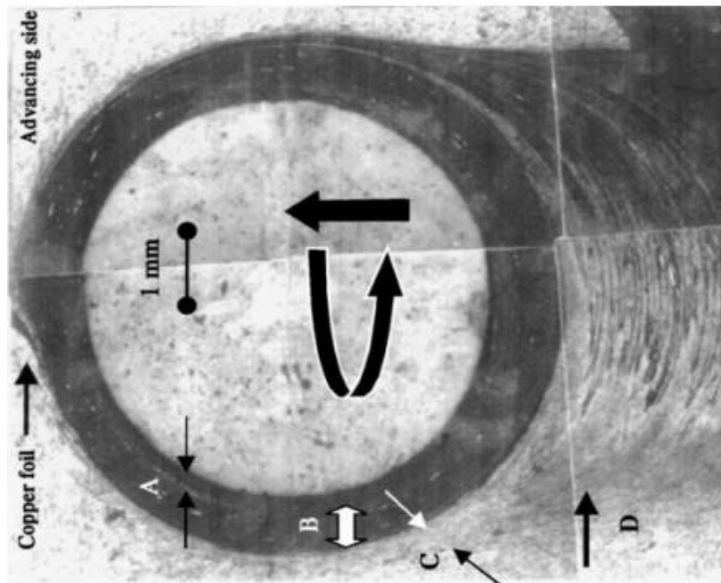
Plan view at mid thickness of weld with a frozen nib. A copper foil marker was on the faying surface of the Al 6061 and is seen at the top. (A) Gap without material. (B) Rotational zone or that rotates with the nib. (C) Transitional zone of material that is entrained by the rotating pin. Small bright particles in B are tracer particles from the copper foil [82].
